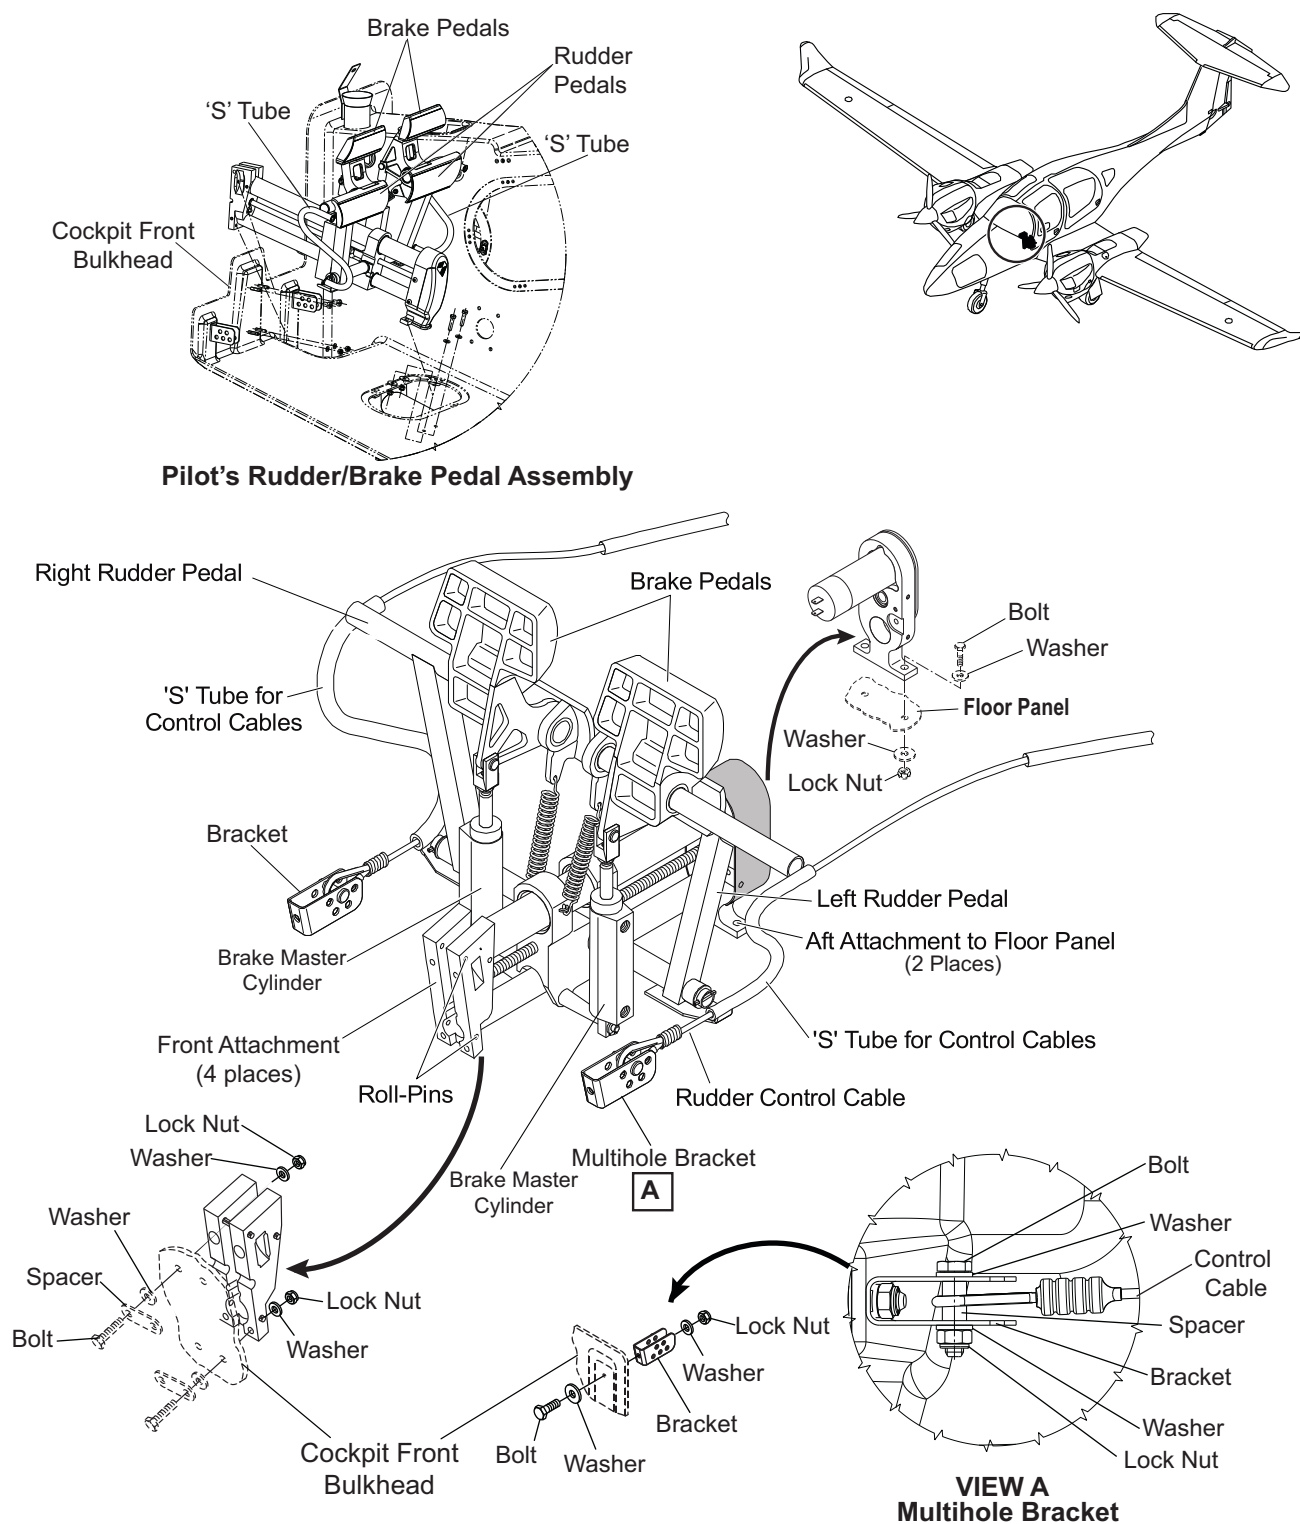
Rudder/Brake Pedal Assembly - Removal/Installation
